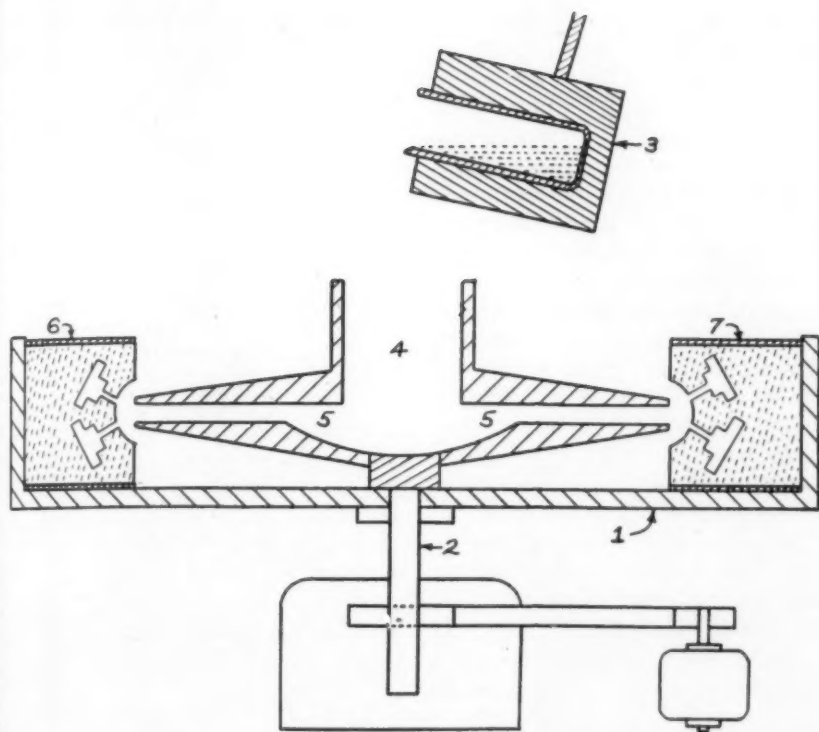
MULTIPLE-MOLD CENTRIFUGAL CASTING MACHINE. 1—BASE. 2—CENTRAL SHAFT. 3—LADLE OR FURNACE. 4—CENTRAL POURING PIT. 5—SIDE GATES OR RUNNERS. 6 AND 7—MOLDS.
